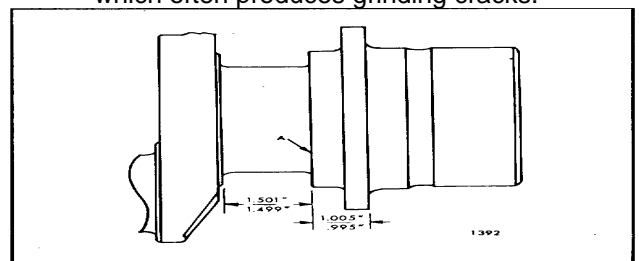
Standard Dimension at Crankshaft Thrust Surfaces
